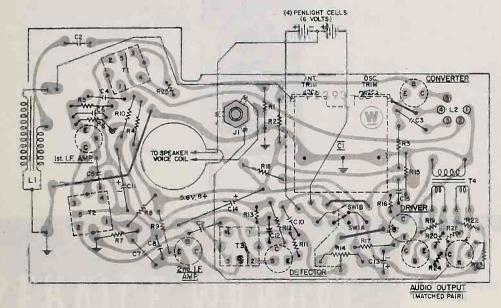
& Bottom view of printed circult chassis with components shown as electrical symbols.
